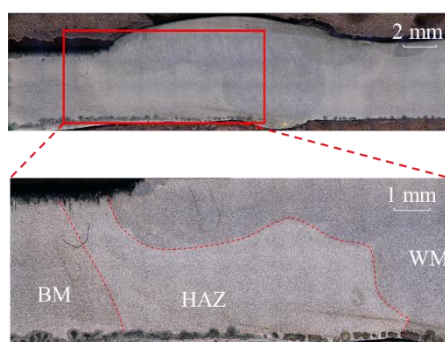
Irregular weld (S700t5N2).
